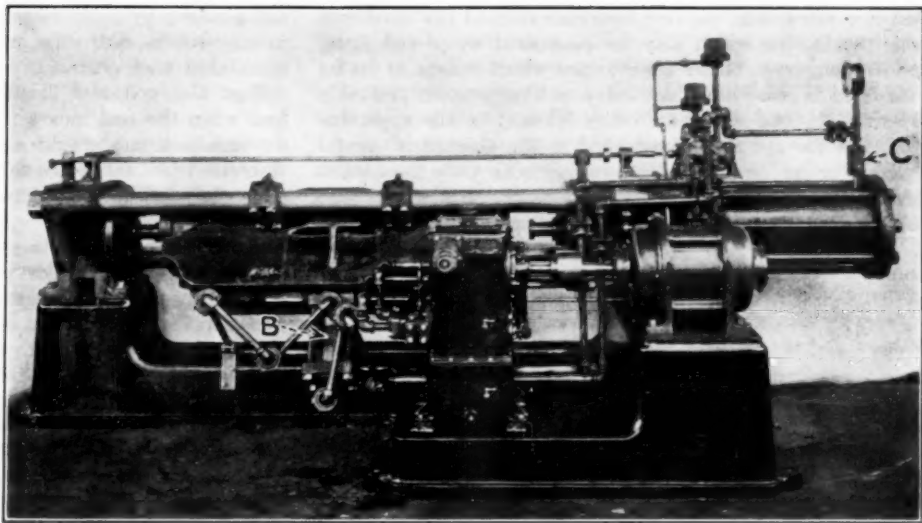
REAR VIEW OF PRESS SHOWN IN FIG. 11
